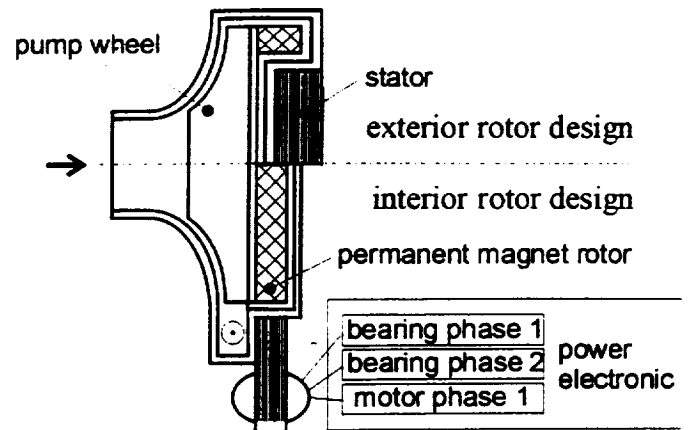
Principle construction of the bearingless motor in exterior rotor design.
